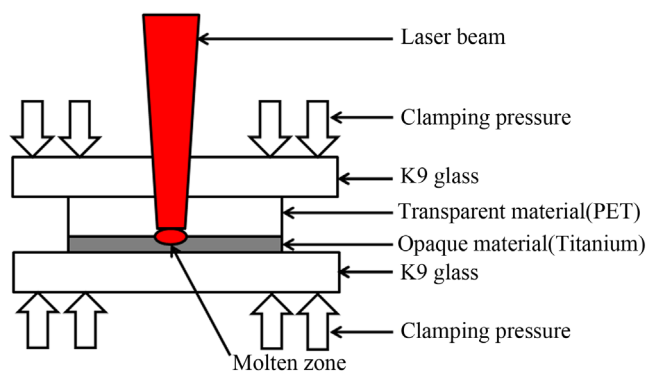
Schematic of continuous laser transmission welding process.
